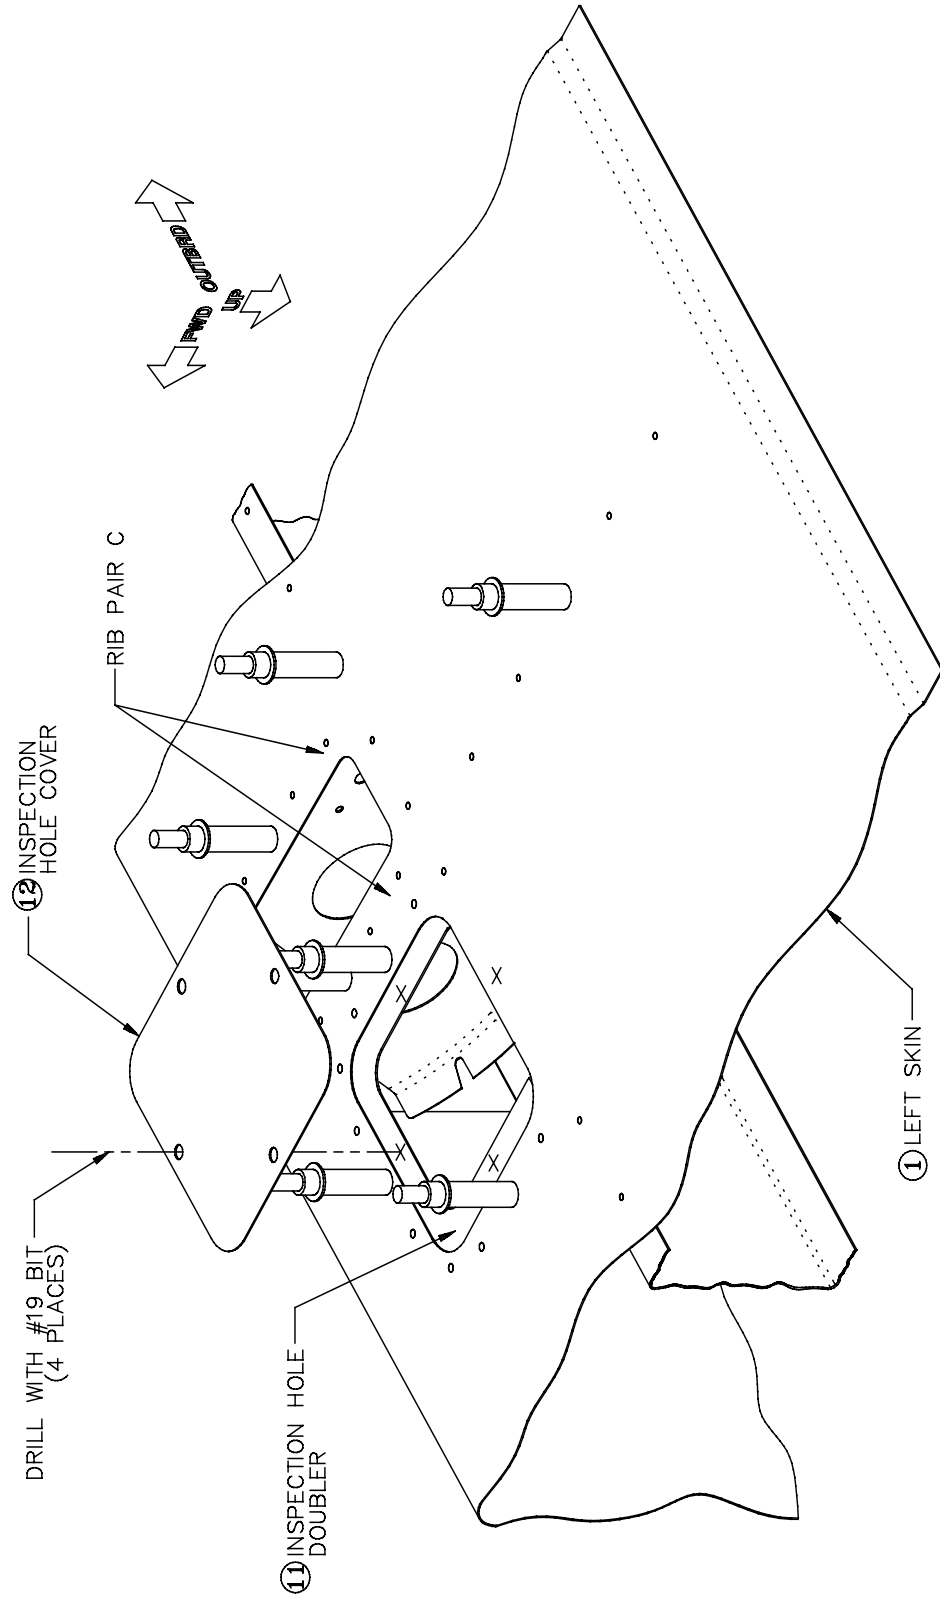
Drilling the Inspection Hole Cover Mounting Screw Holes
